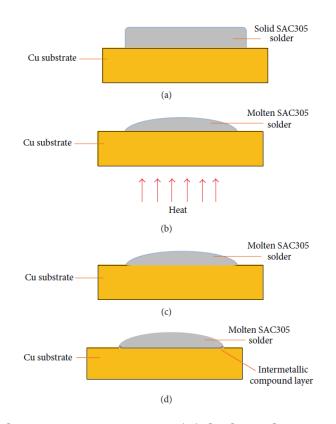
5 Solder Wetting Process: (A) SAC305 Solder on The Cu
